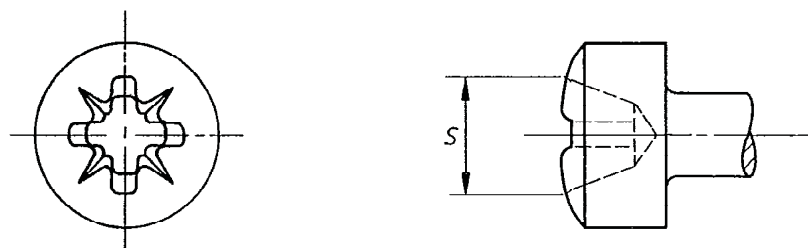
Recessed raised cheese head machine screws: enlarged views of recess type Z
